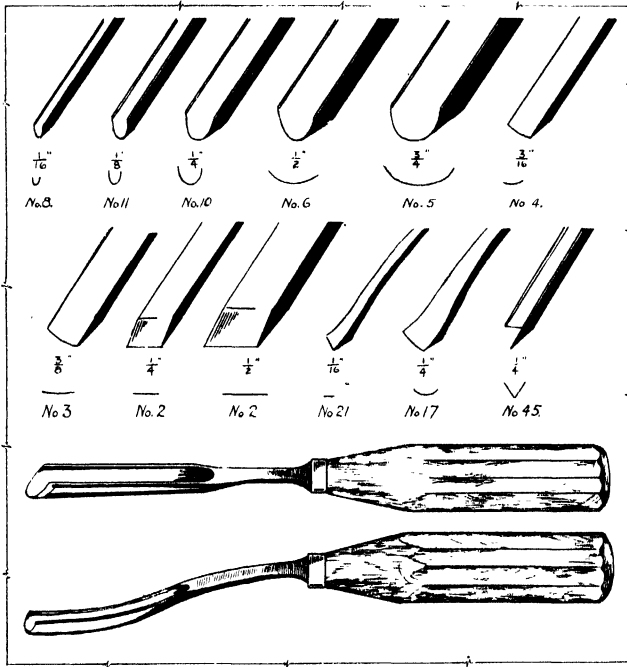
Some sizes and shapes of carving tools most used by the beginner
